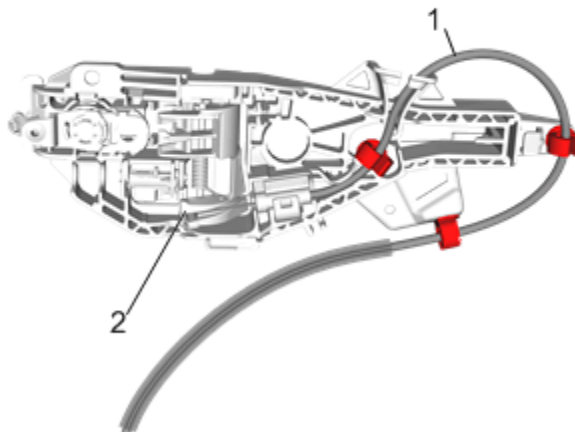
Side Door Outside Handle Bracket Cable And Counter Balance
